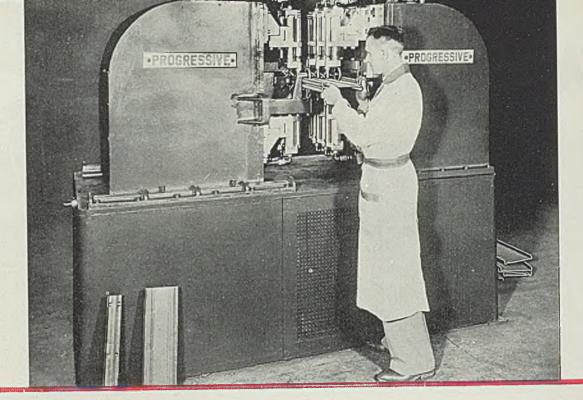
One of two Progressive spot welding machines capable of spot welding a total of upwards of 2400 lineal feet of Stran-Steel framing members per hour employs twelve vertically opposed sliding contact guns short-coupled with six transformers mounted in the base and sides of the machine
